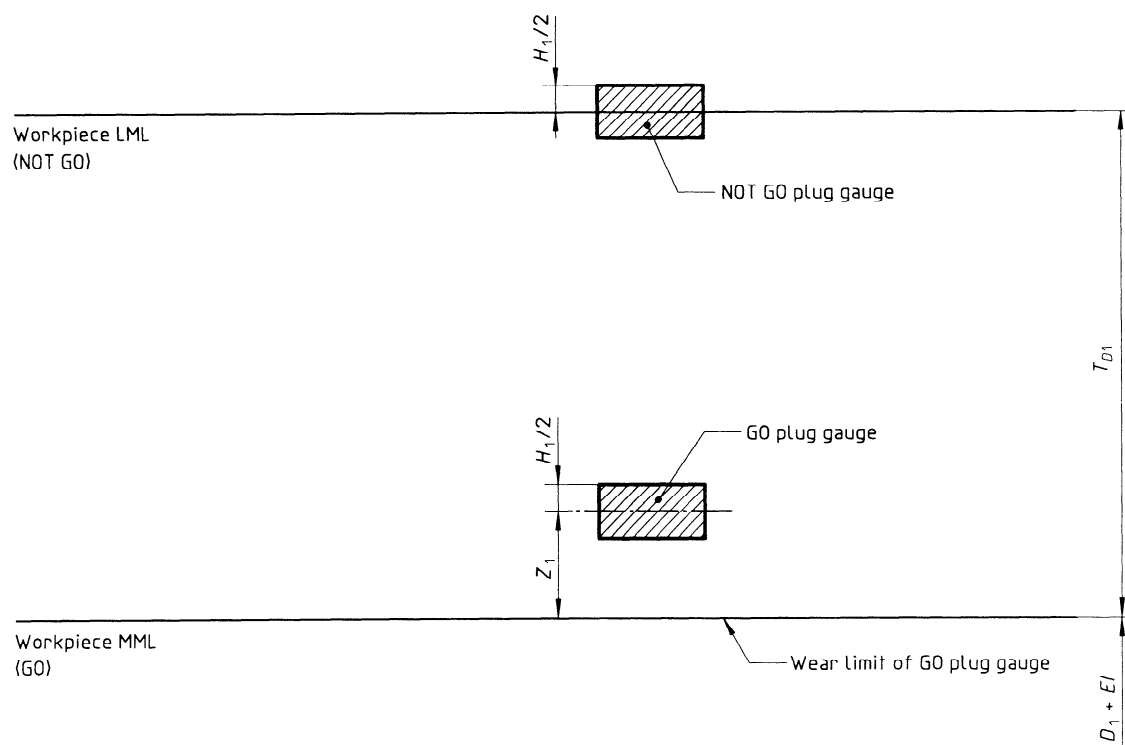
Tolerance zones for plain gauges for minor diameter of internal threads (diagram)
